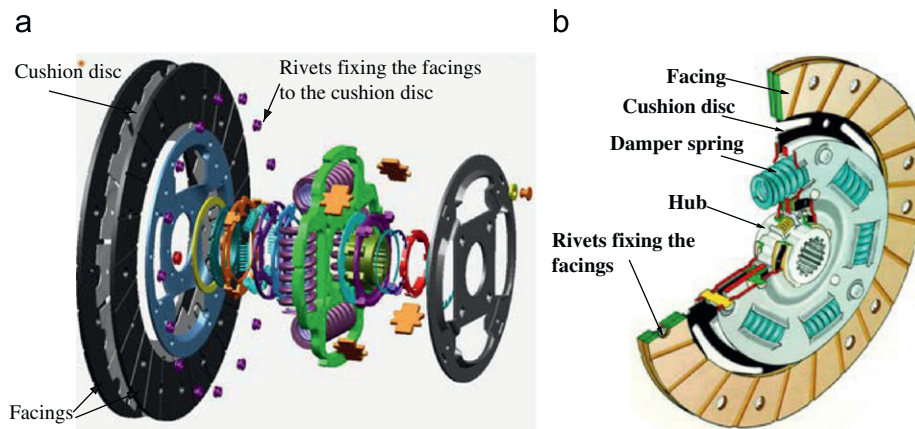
Detailed design of the clutch disc: (a) exploded view, (b) complete view.
